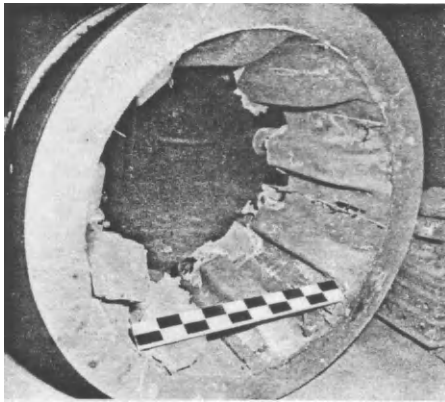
Extension tube fed by feeder heads with exothermic sleeves. Lower flange fed by means of shoulders to give a sound casting.
